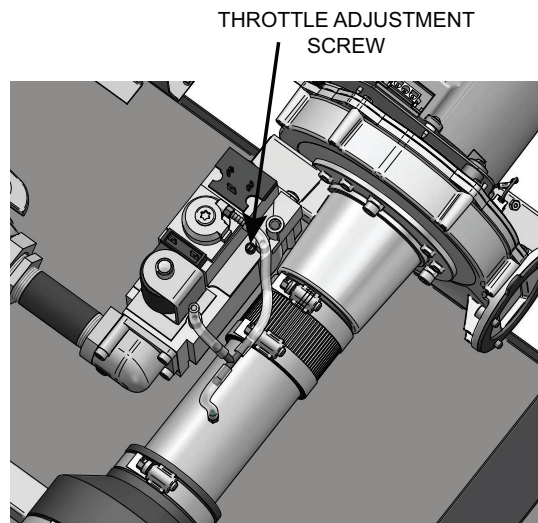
Gas Valve Adjustment: Models 150 - 285
